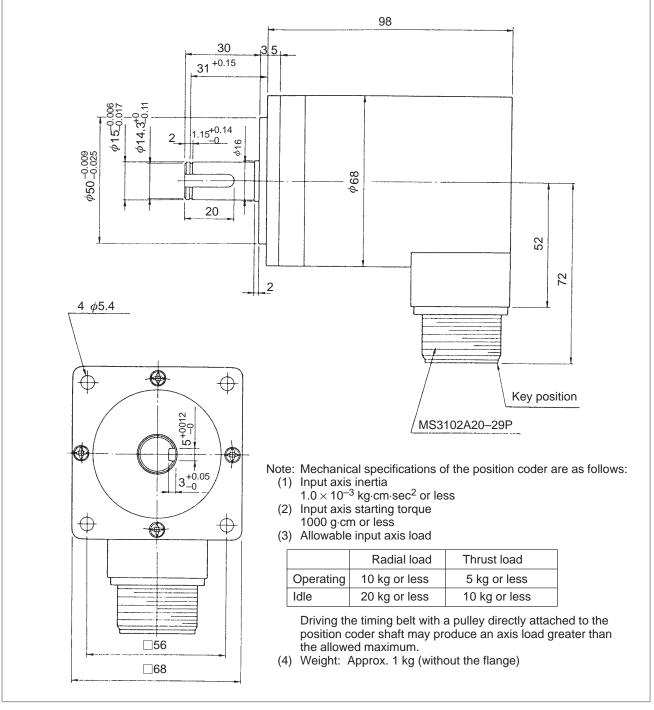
External dimensions of position coder Specification No.: A86L-0027-0001#102 (Max. 4000 rpm) A86L-0027-0001#002 (Max. 6000 rpm)
